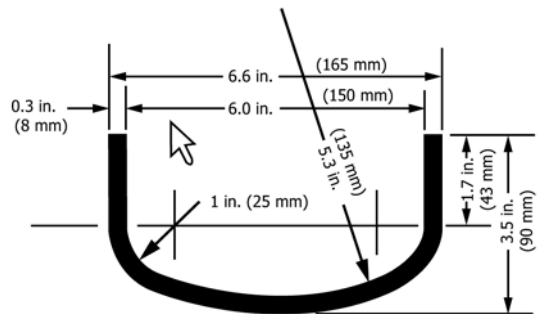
Standard 6-in. (150-mm) Weld Cap
